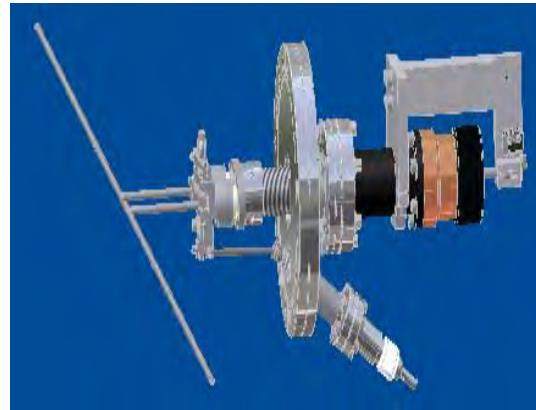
The glow discharge cleaning assembly in chamber vessel has a control bar at front panel
